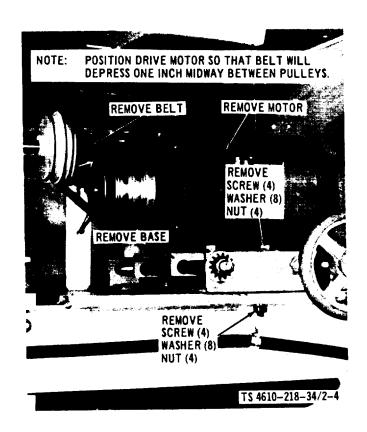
Erdlator Agitator Drive Motor, Removal and Installation
